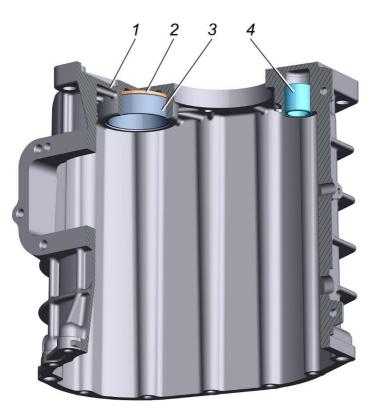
Gearbox front housing: 1 – front gearbox housing; 2 – adjustment ring; 3 – countershaft bearing cage; 4 – linear motion ball bearing
